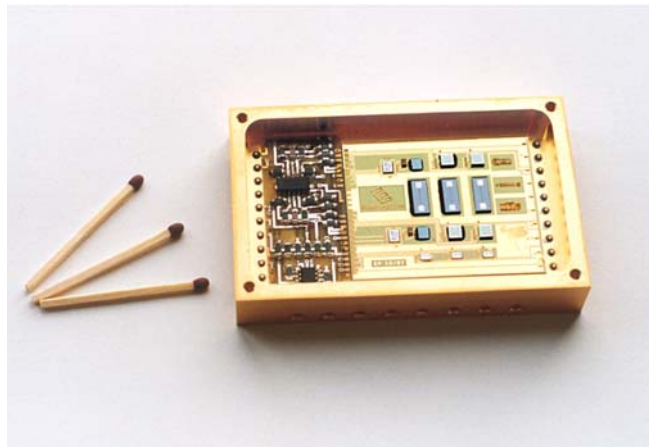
A silicon-glass board with assembled fluidic components and interfacing electronics. This is a demonstrator product that is manufactured in the EuroPractice MC4 cluster project.
